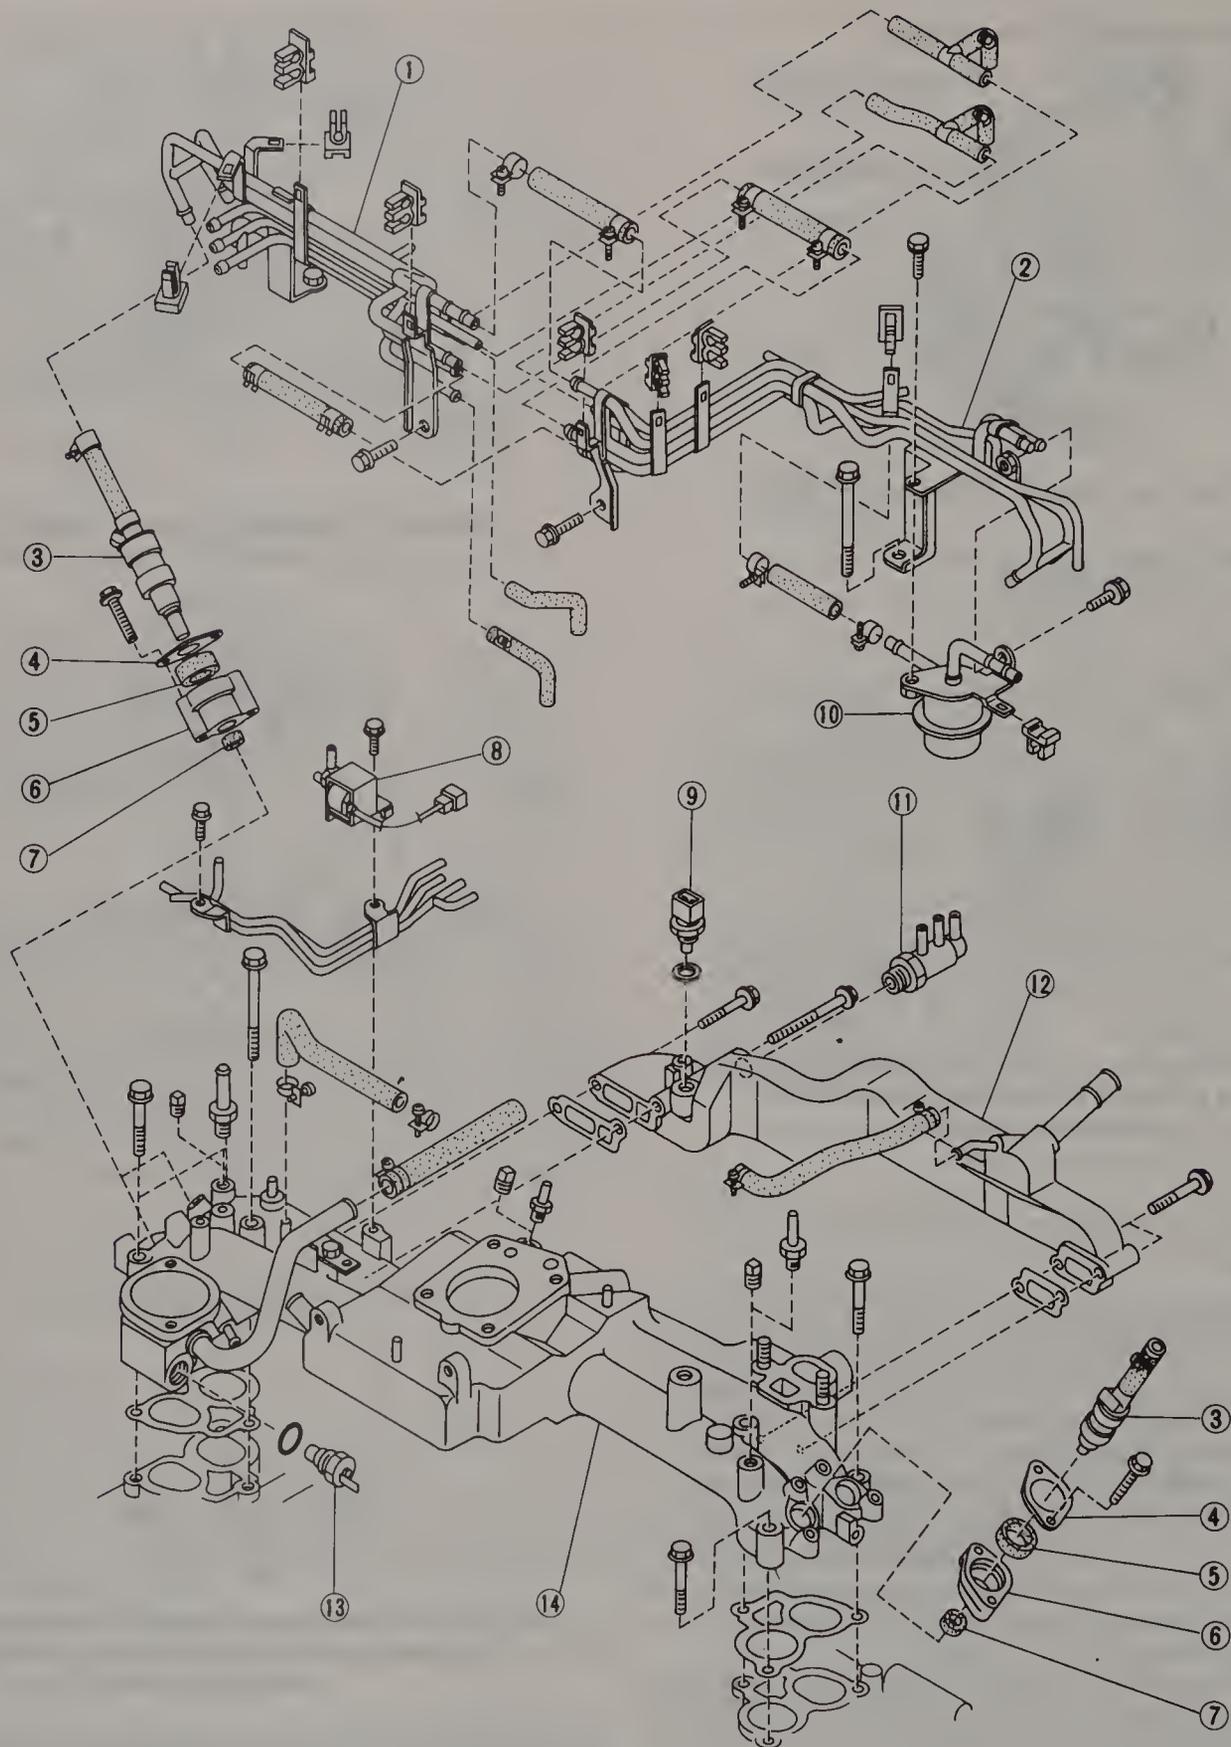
MPFI system fuel line components — exploded view (Sec 9)
